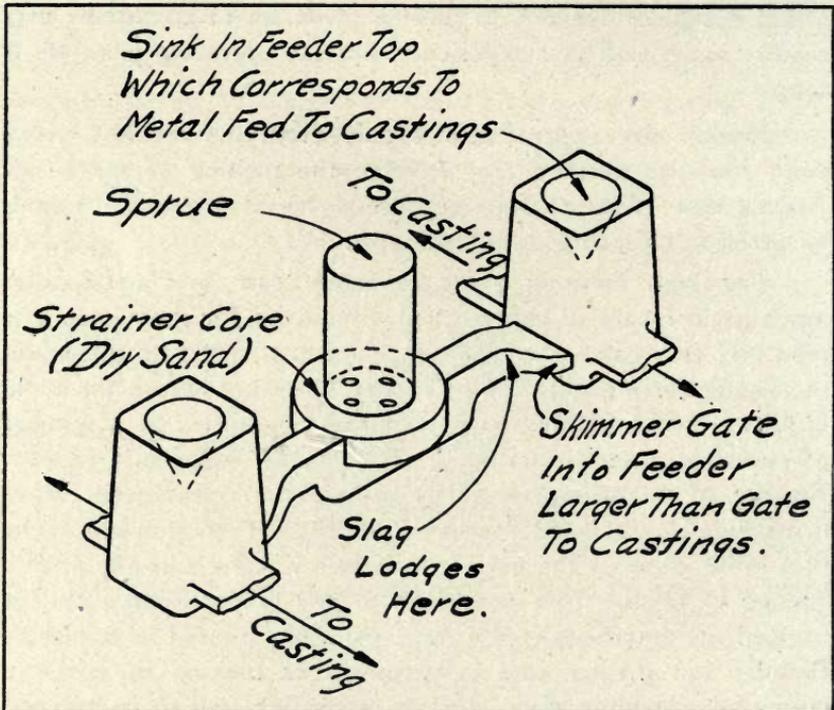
Typical gate for malleable castings showing strainer, core and skimmer gates for furnishing clean metal for feeders and producing sound castings
